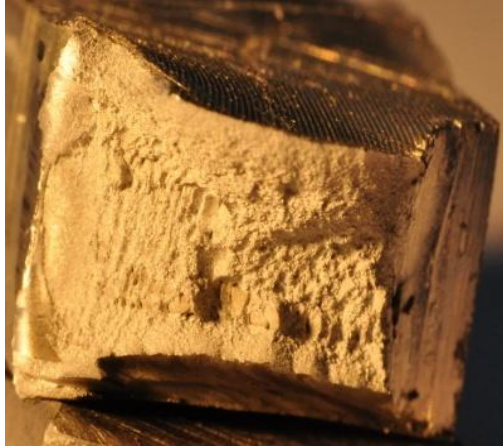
₁. Macrophoto. fracture (700rpm,100mm/min)
